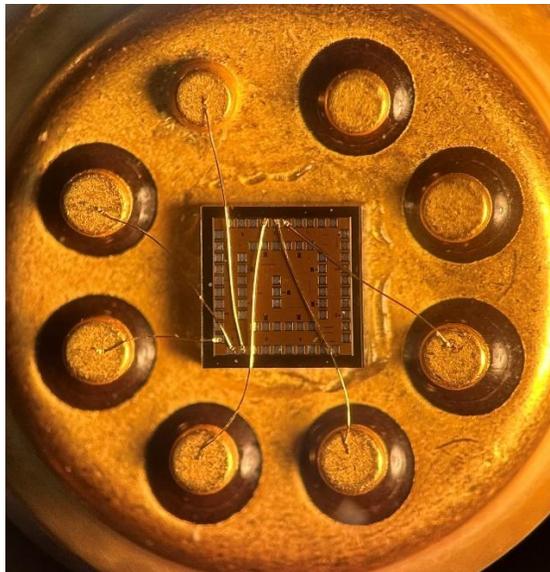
Chip 3 from board 14 with SPADs 3I and 3D wirebonded
